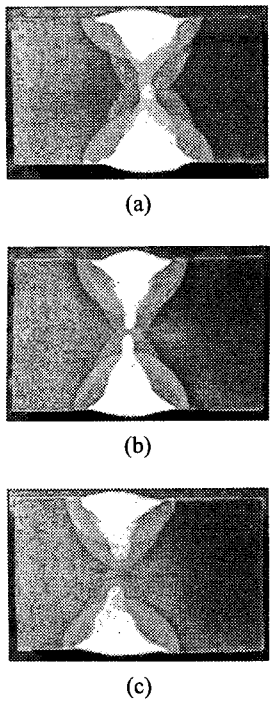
Welded penetration shape, (a) Full, (b) Partial RF1/8, (c) Partial RF1/4
